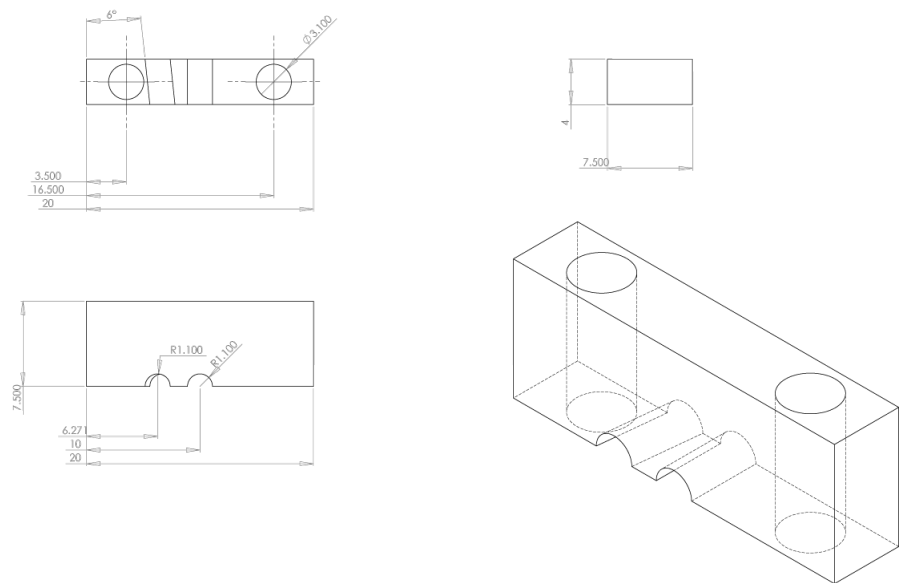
A SolidWorks drawing of the surface ion trap oven holder.
